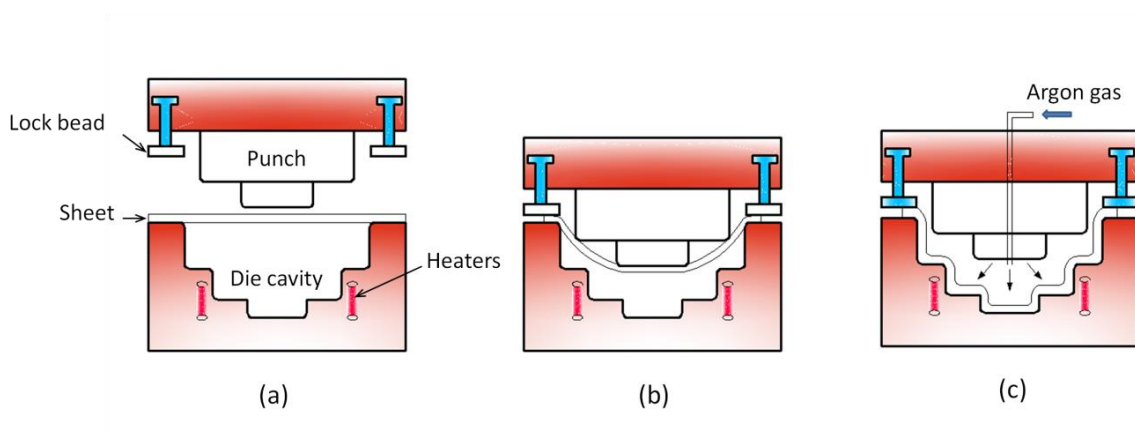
Schematic of the superplastic-like forming process: (a) heating and clamping, (b) hot drawing and sealing and (c) gas forming.
